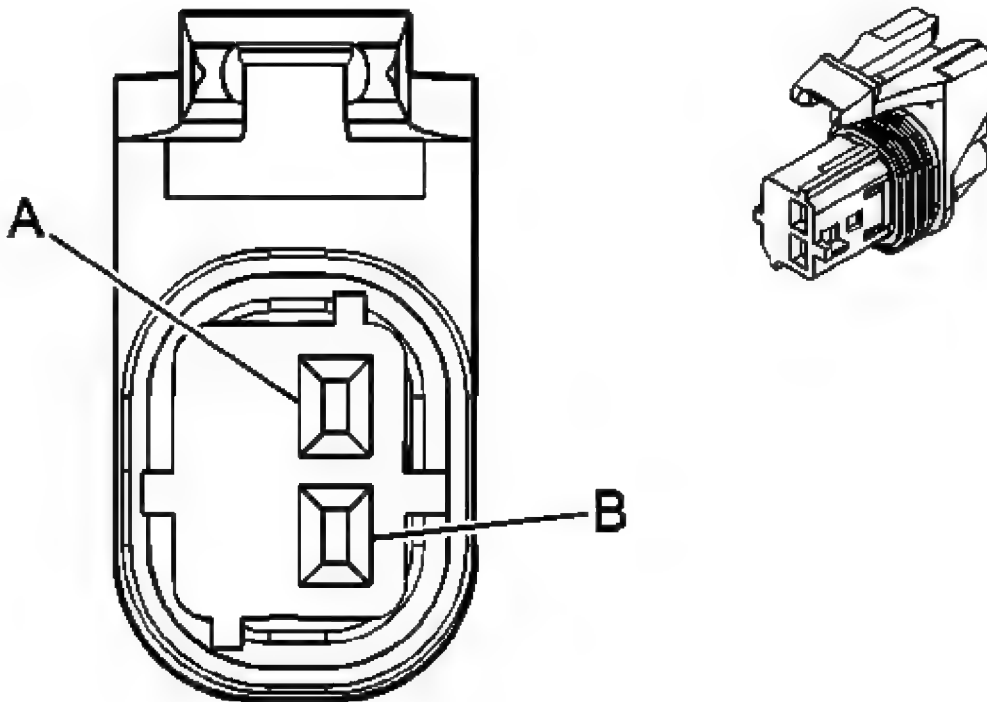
Inflatable Restraint Side Impact Sensor Connector End View - Right
